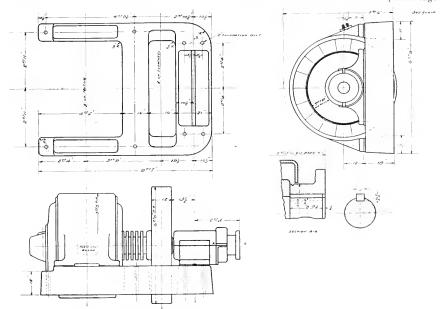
Outline Drawing of 16/20 '36 pole, 250, 200 120-h.p., 300/240/133-r.p.m. Concatenated Induction Motor Set Installed by the Ludlum Steel Company. The two Motors are in one Frame
